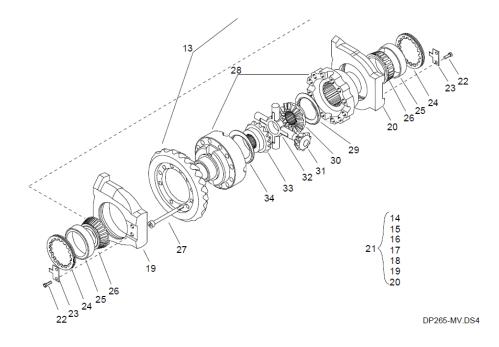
Explosion view of a typical Sisu Axles differential gear. (Marmon-Herrington 2009)
